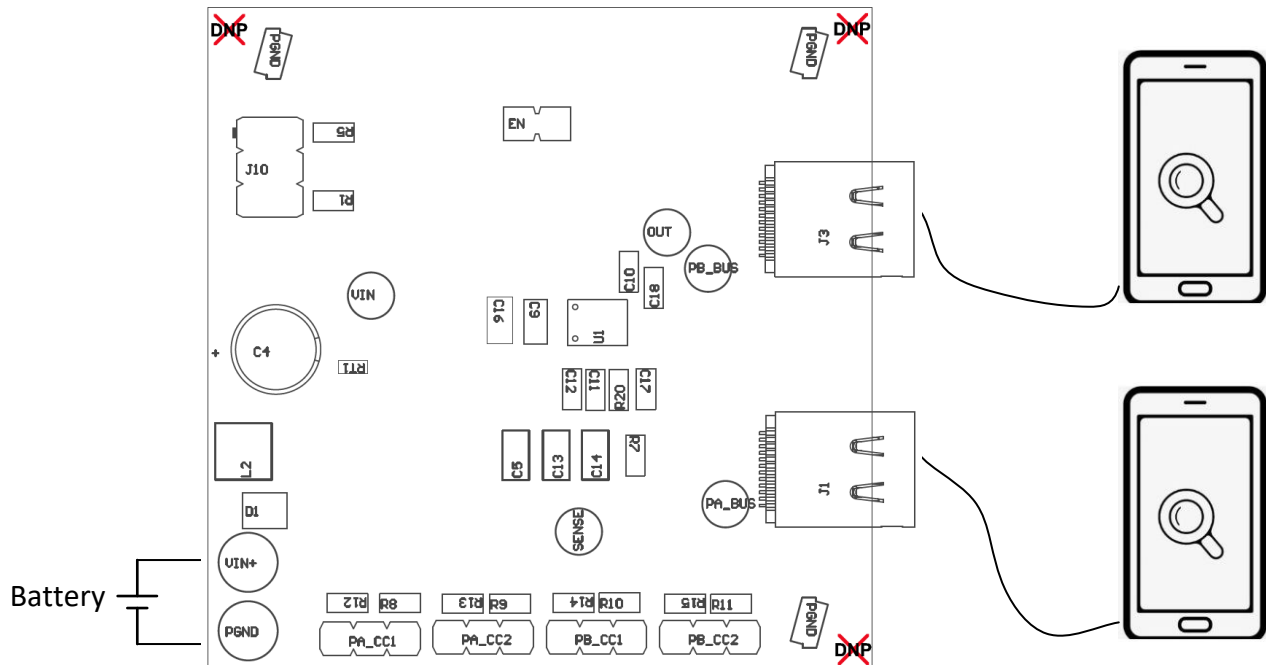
EVM Setup for Charging USB Type-C® Device
